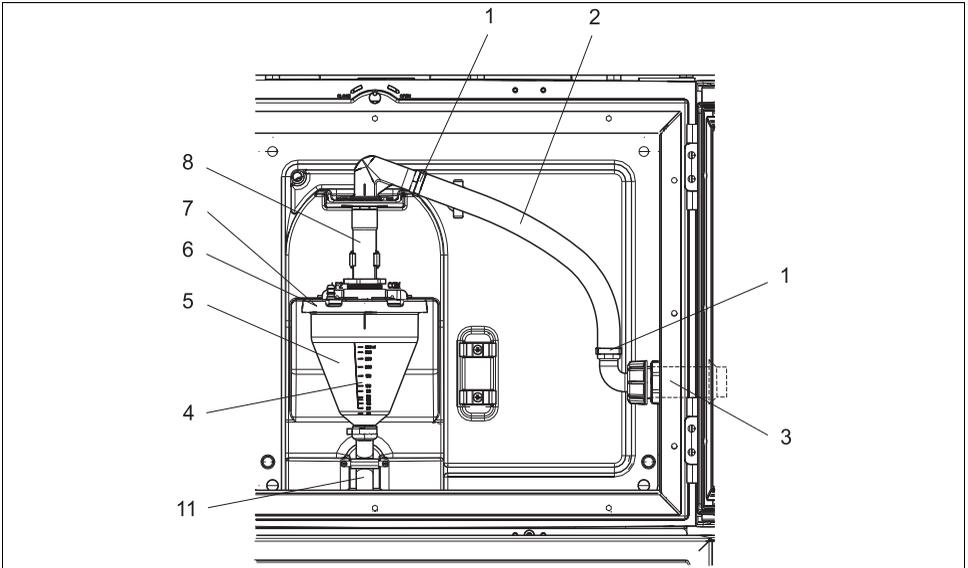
Spare parts for version with vacuum pump (view in front of pump holder)
